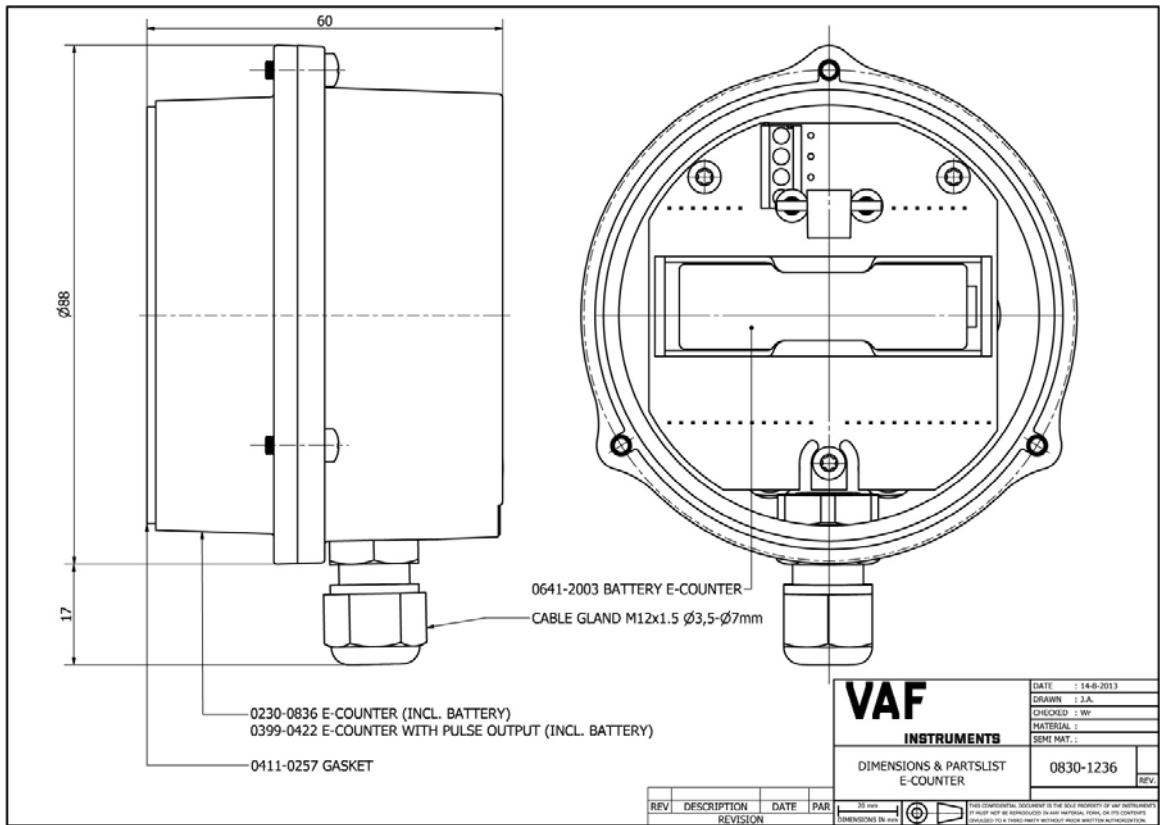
Drawing 0830-1236 – E-counter dimensional drawing and partslist
